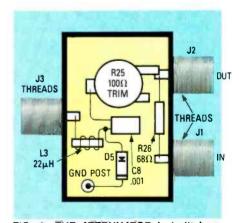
THE ATTENUATOR is built in a gutted splitter. The assembly will be simplified if you follow this parts layout.
